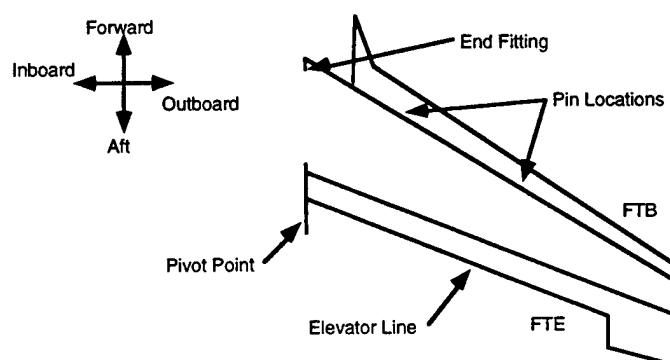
Loading of the FTE and FTB starts the assembly of the right stabilizer.
